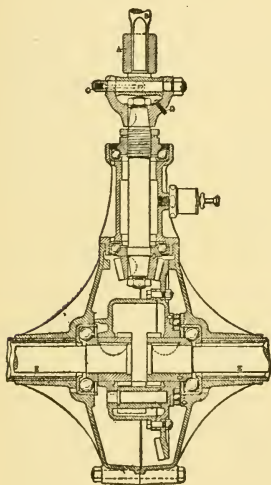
Sectional diagram of bevel gears for a shaft drive, showing arrangement of the propeller shaft and location of the thrust bearings.
